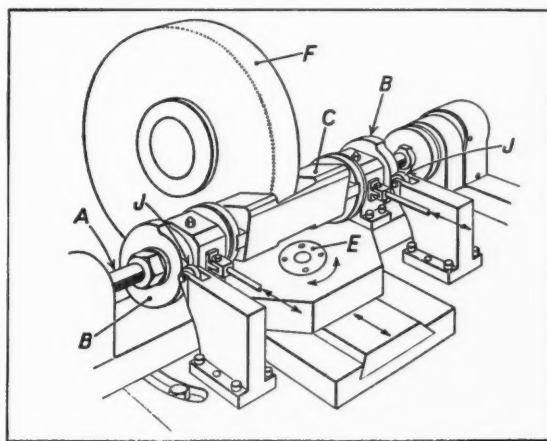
Special work-holding fixture and pneumatic, cam-operated profile attachment used on centerless grinding machine seen in Fig. 3
